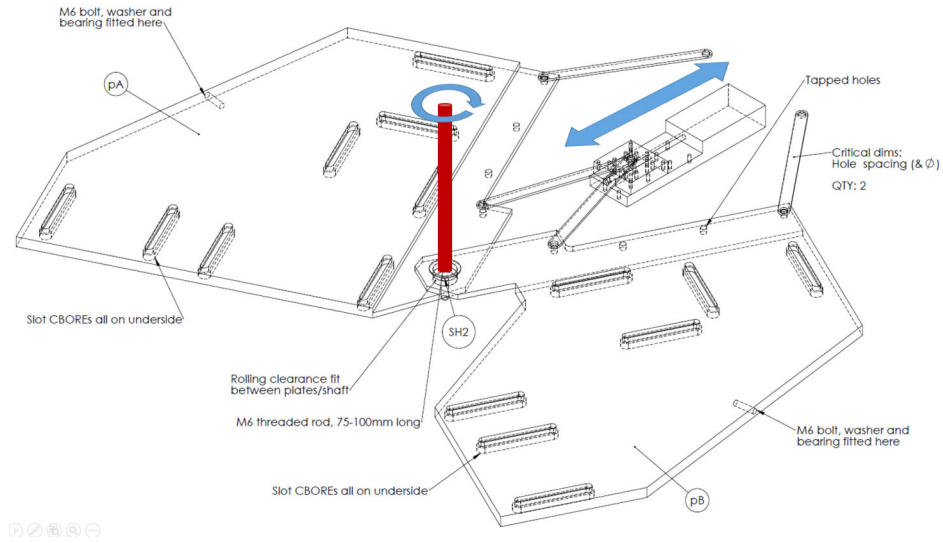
Technical drawings of the mechanical components of the angular measurement setup. The plates are pushed by the linear optical stage and pivot around the point marked in red.
